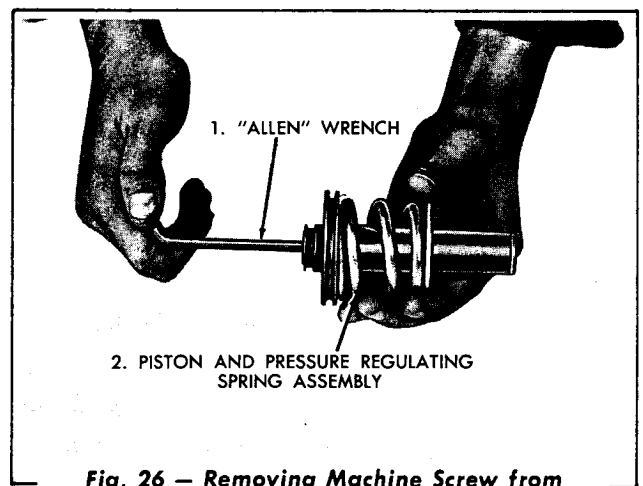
Removing Machine Screw from Piston and Pressure Regulating Spring Assembly
